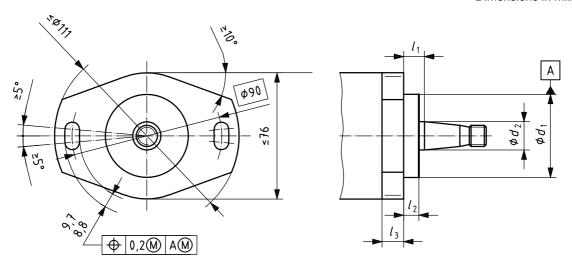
Fuel injection pumps — Type 1 end-mounting flange
